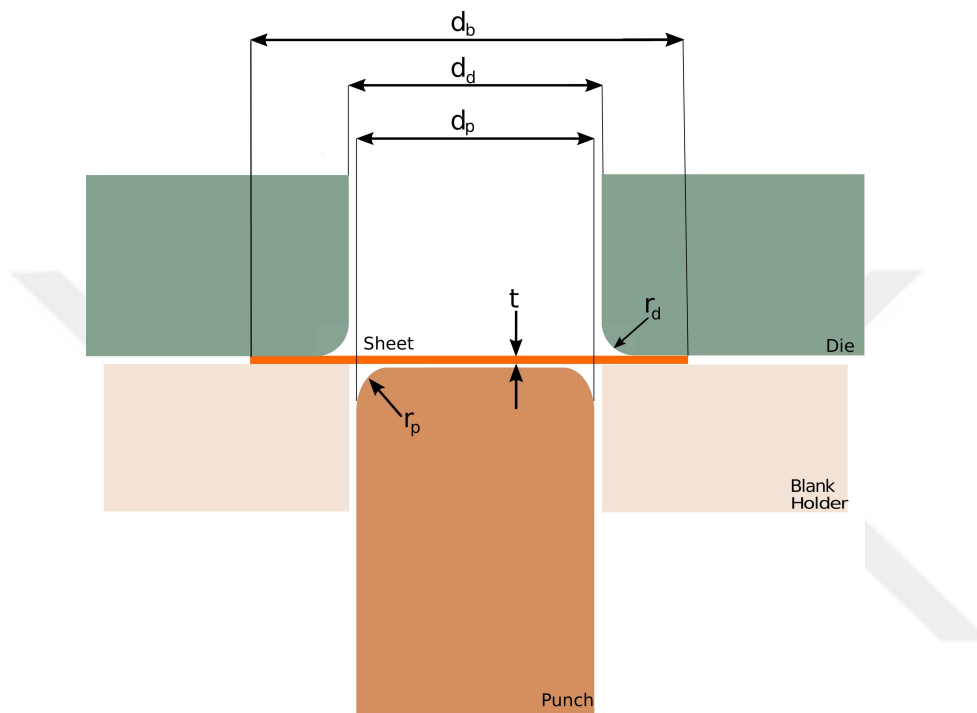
Schematic views of the tools and blank used in the square cup drawing
